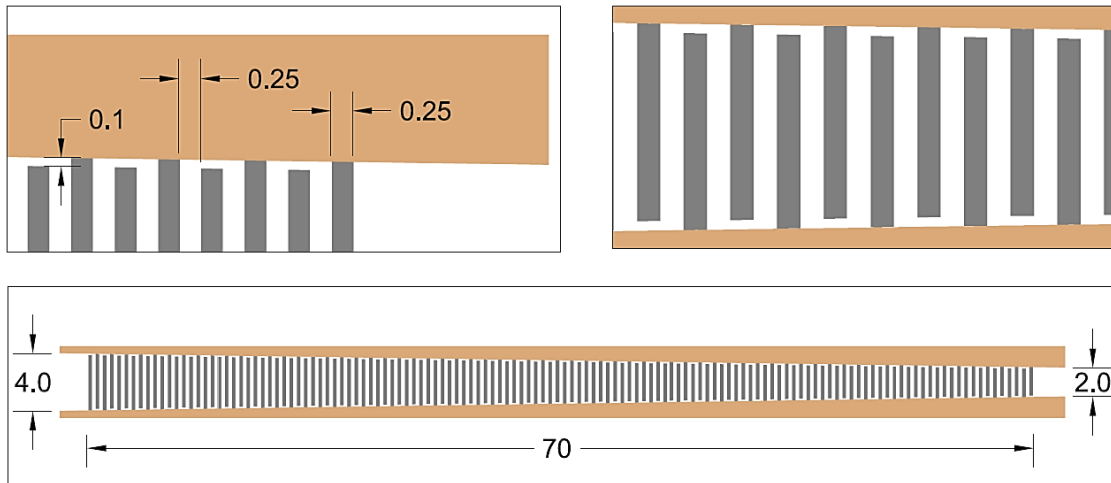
Proposed cantilever beam model for mycotoxin detection (dimensions are in mm)
